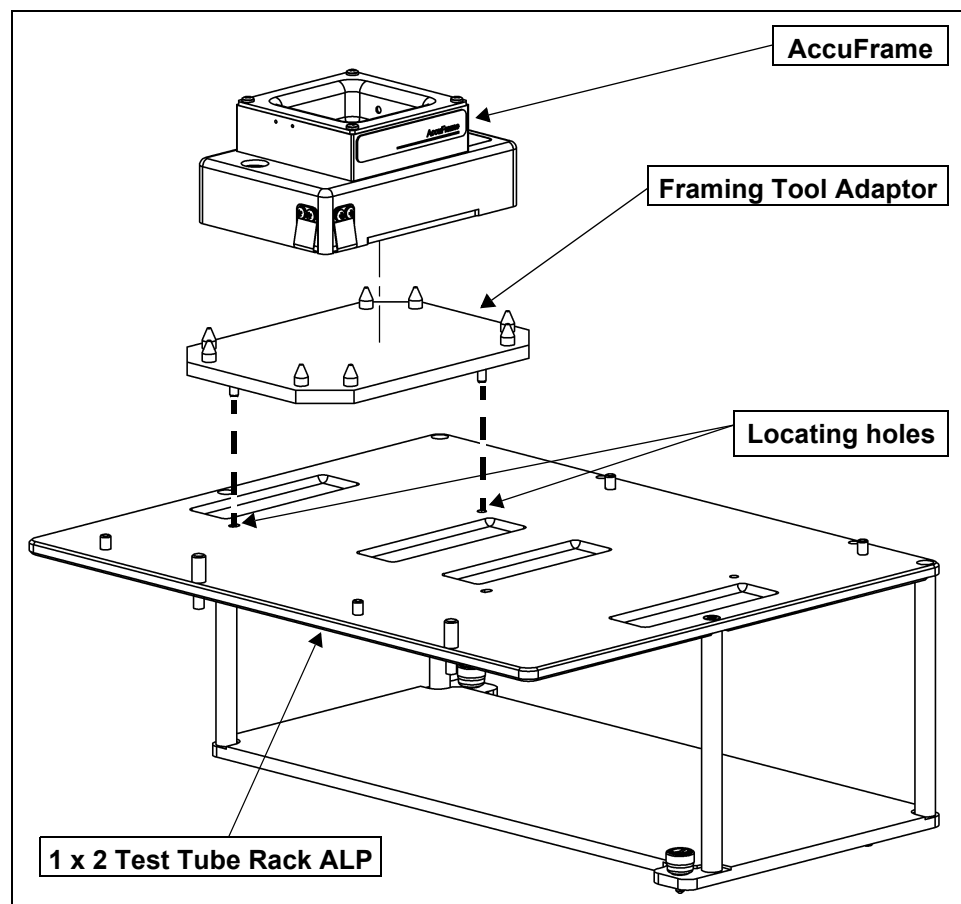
Framing for the 1 x 2 Test Tube Rack ALP (left facing)
